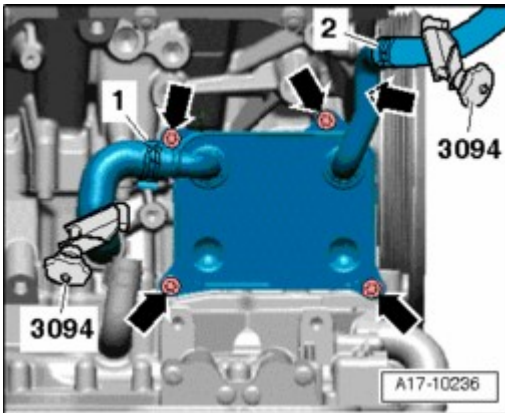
Clamping Off Coolant Hoses With Hose Clamps Hose Clamps Up To 25 mm Dia. 3094
